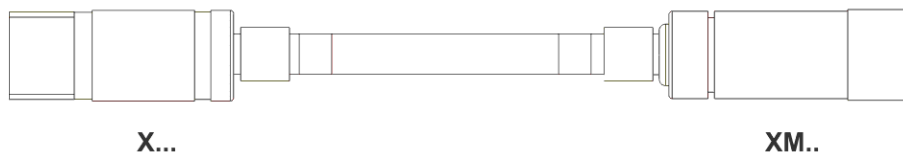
Connecting cable, motor cable X30.1 - X30
